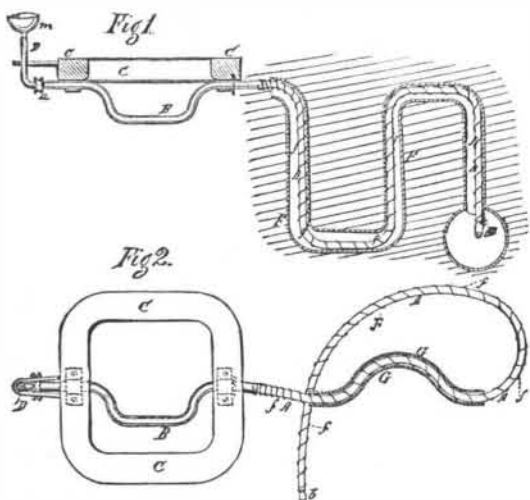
is a side elevation, and Fig. 2 is a plan view.
